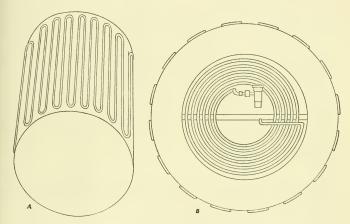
Detachable refrigeration assembly: A, outside view; B, inside view.
